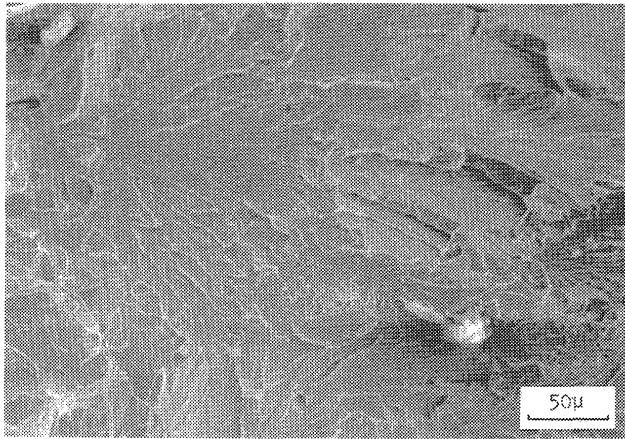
Wide dimple region at the vicinity of the bottom of the notch in the positive specimen (B1)Fig. 2 Example of unit crack path at the cleavage fracture surface in the positive specimen (B1)
